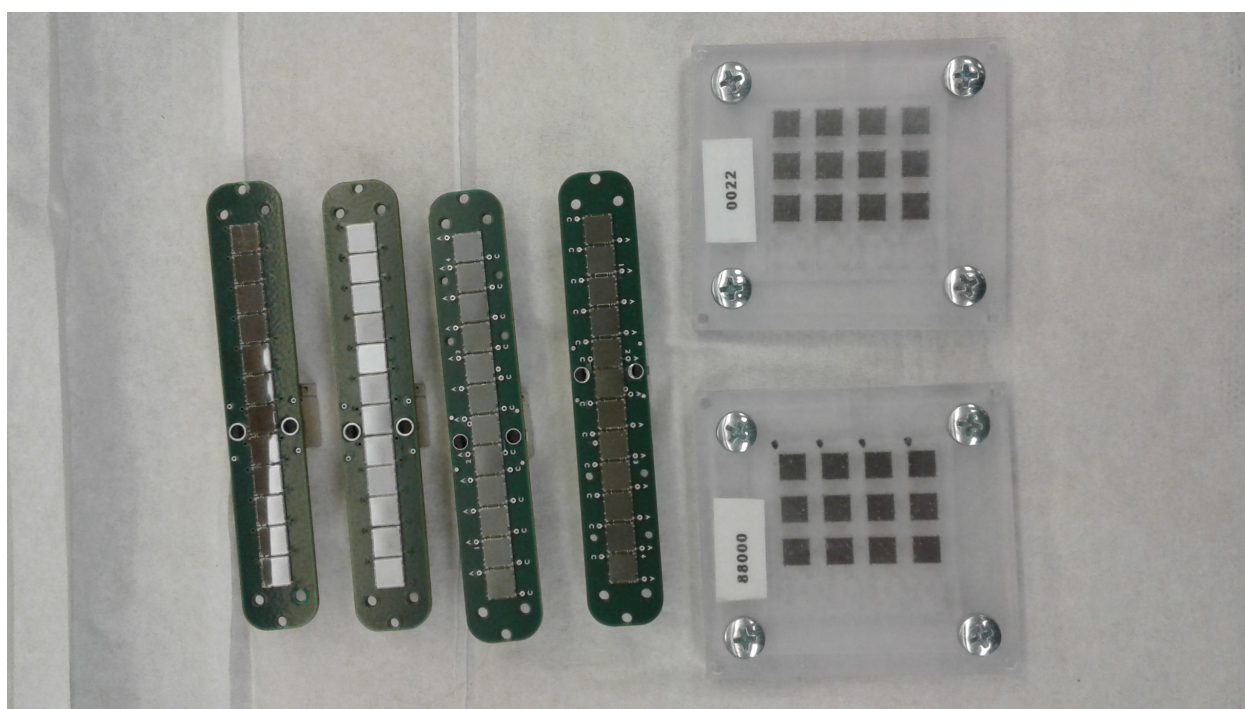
Fully assembled circuit boards with SiPMs, also called hover boards, and waffle packs shown together.
